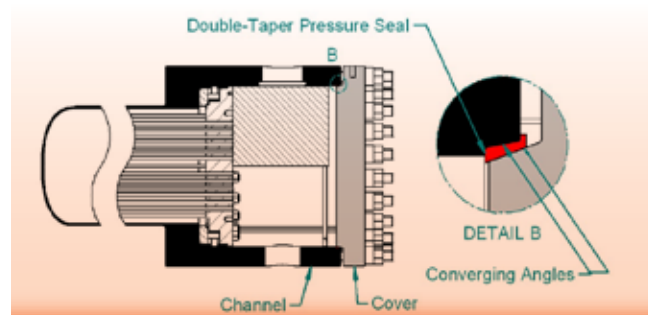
Schematic of exchanger design with double taper pressure seal [5]
